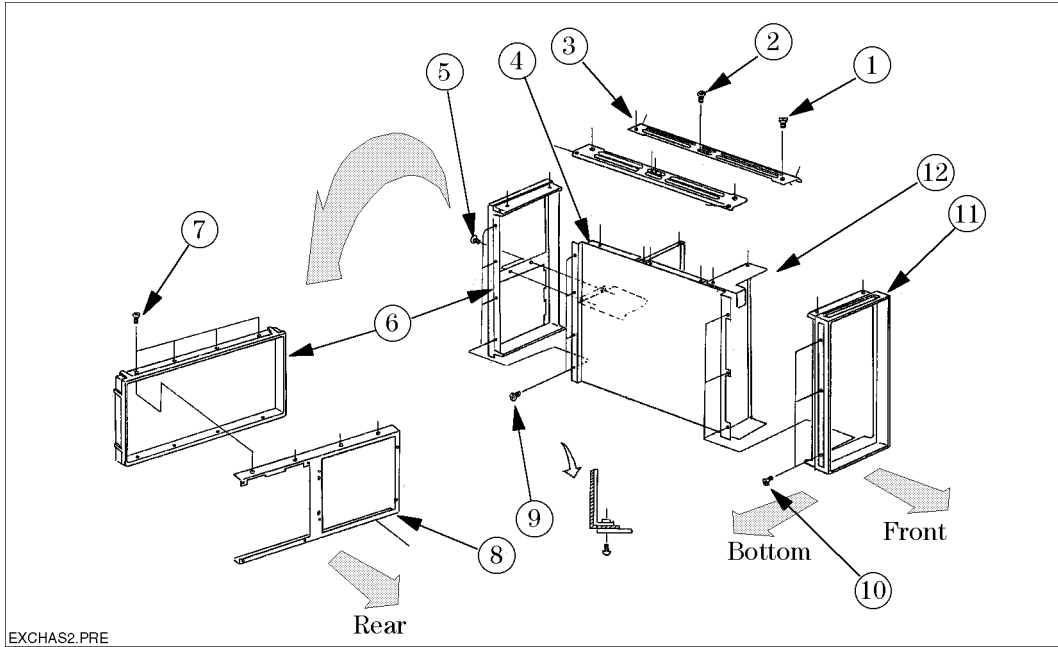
HP 41501B Chassis Parts Location (2 of 2)
